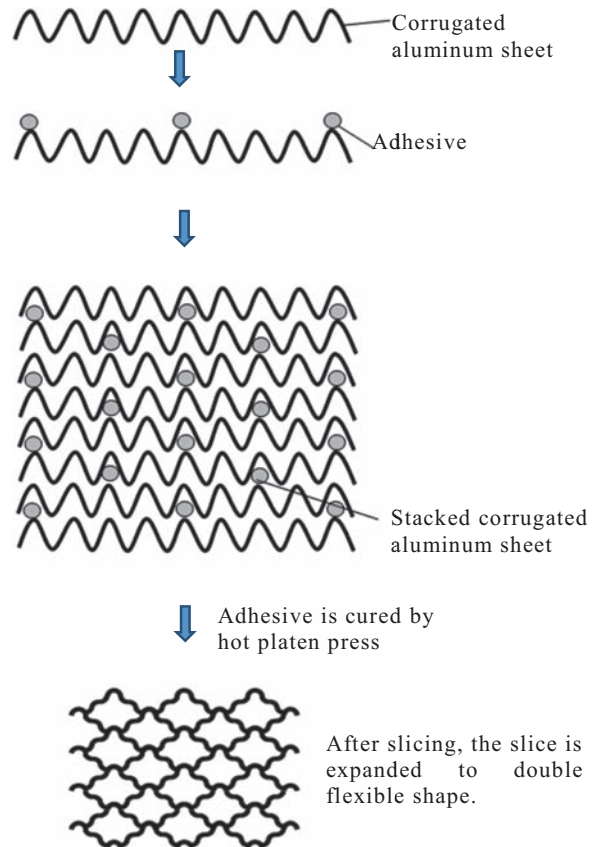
Manufacturing flow for double-flexible honeycomb core
